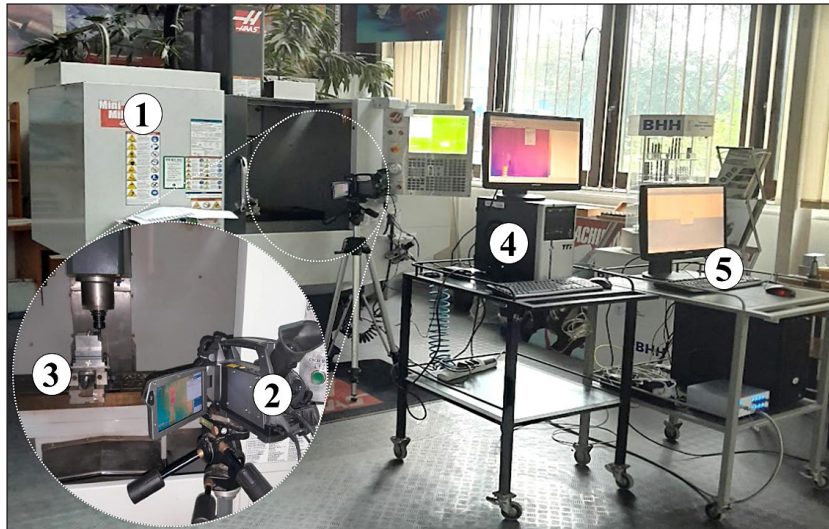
S Test stand (1) –HAAS MiniMill 2 milling machine, (2) – thermovision camera, (3) – dynamometer, (4) –PC with camera operation software, (5) PC with dynamometer operation software
